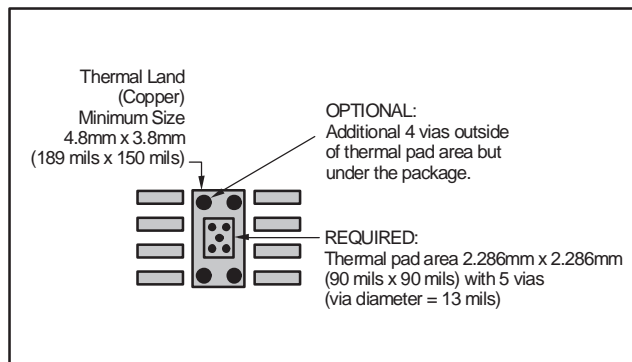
8-Pin PowerPAD PCB Etch and Via Pattern
